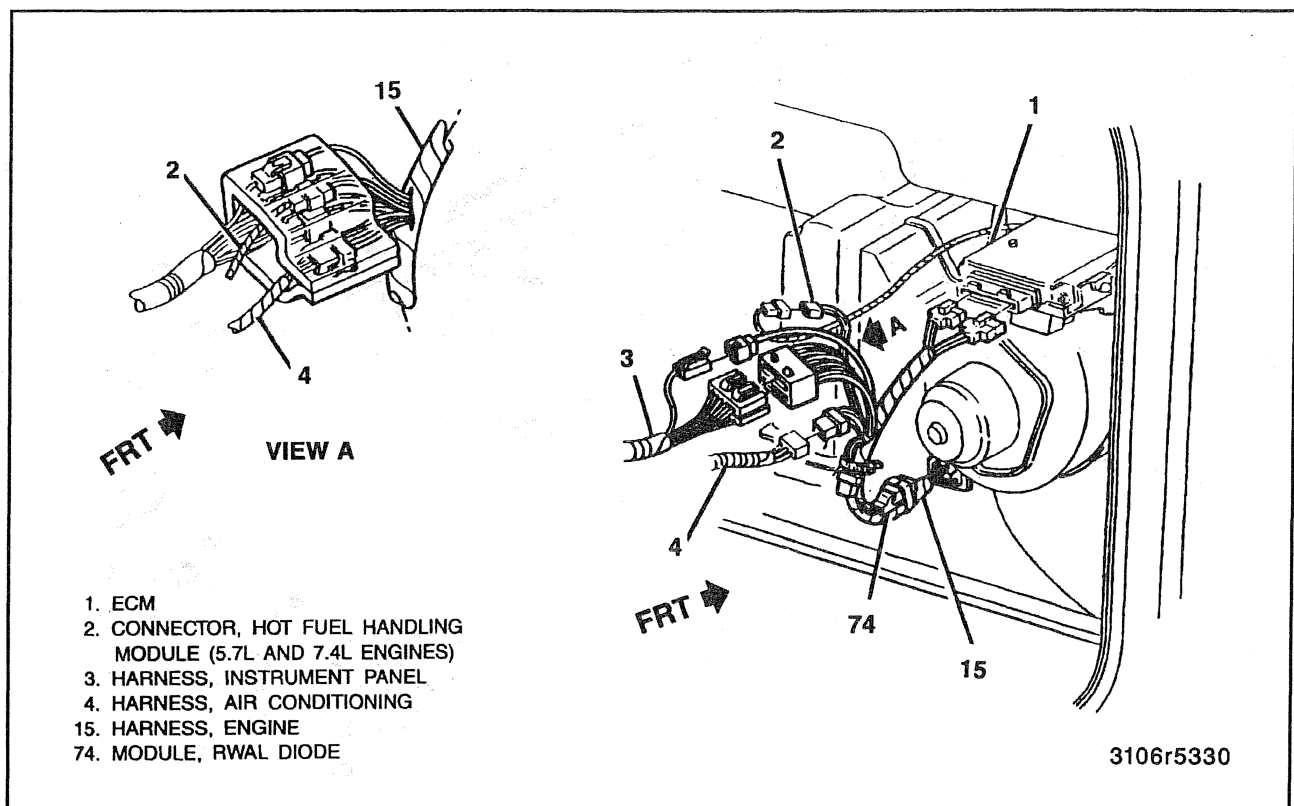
Engine Wiring to the Control Module (Gas Engines)
